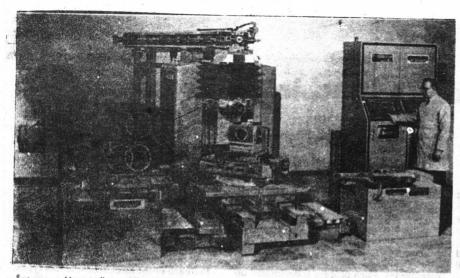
Numerically controlled machining center that can change workpieces as well as cutting tools. Courtesy of Kearney and Trecker Corporation
